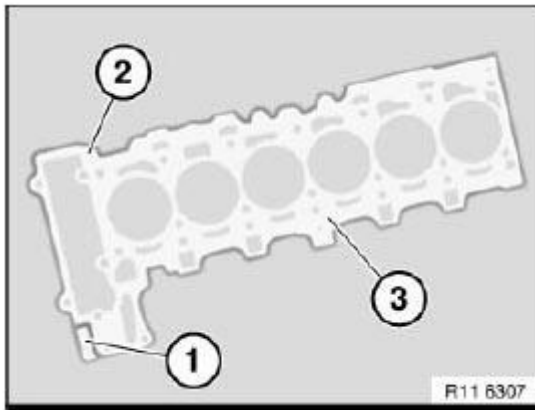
Identifying Identification Mark Of Head Gasket (N54) And Gasket
